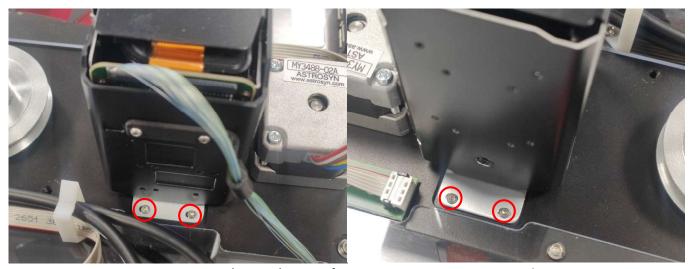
4x (T6 Torx) screws fixing camera to main mounting plate.
